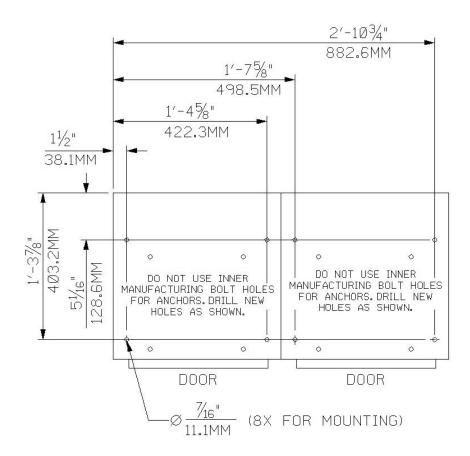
Mounting Hole Locations 1x1 Cylinder Enclosure or 1x1 Cylinder Euro (XH) Enclosure
